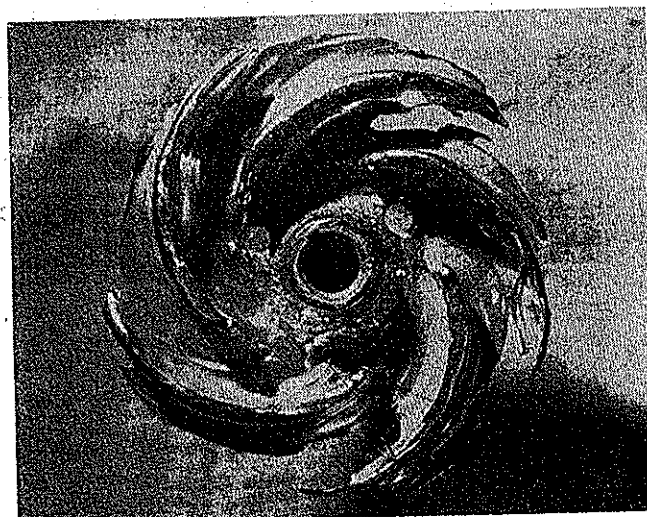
Eroded stainless steel pump impeller—gross photograph
